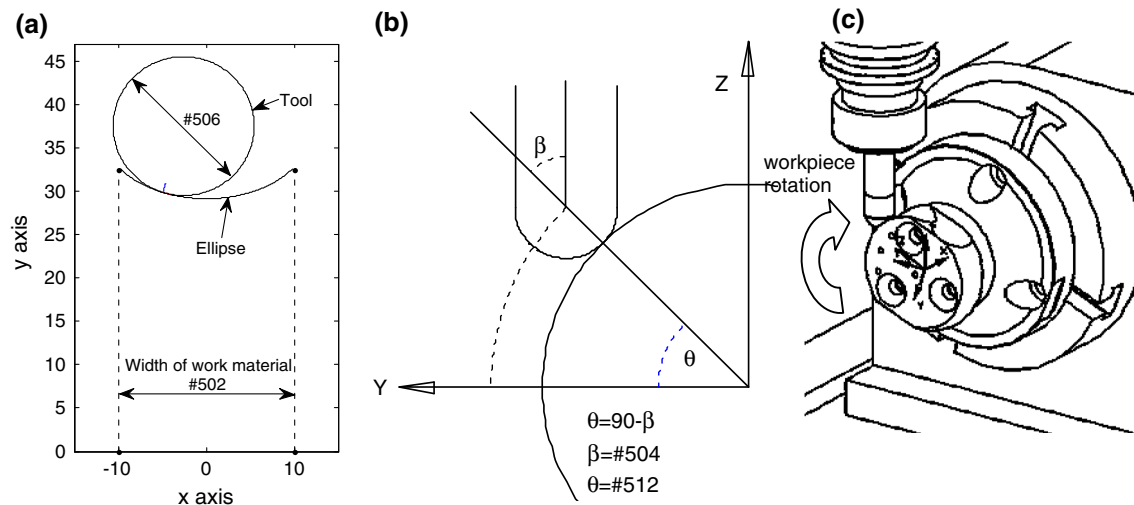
a Ellipse profile and cutting tool, b, c positioning of the cutting tool. Symbol (#) represents the parametric variables used
